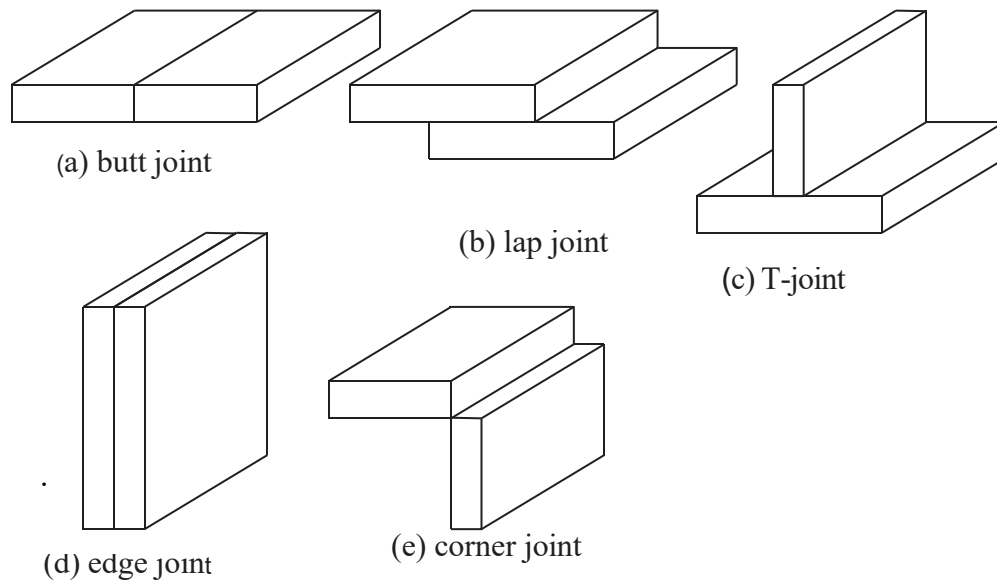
Five basic types of weld joint designs [49]
